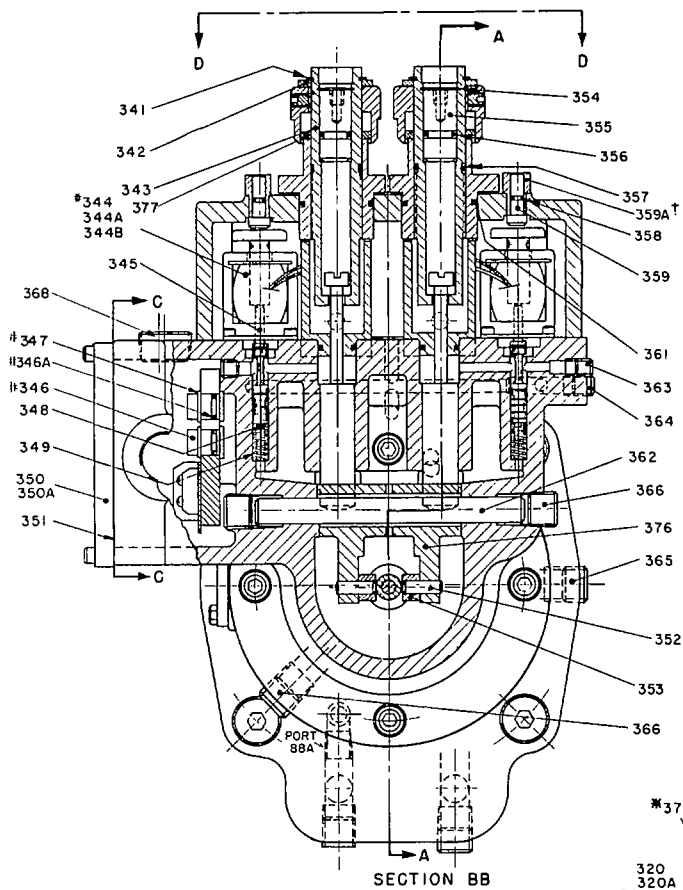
Parts Drawing, Oilgear Type "M" Controls. DS-947280-H (501017-H, Sheet 1 of 2)
